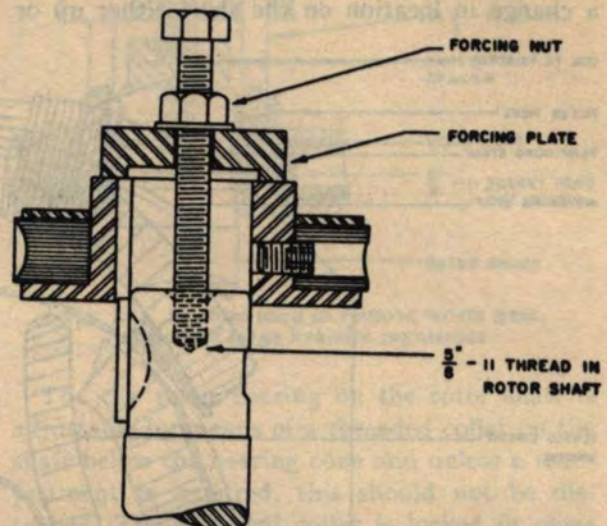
Method used to assemble worm gear, typical of large kva-size regulators
